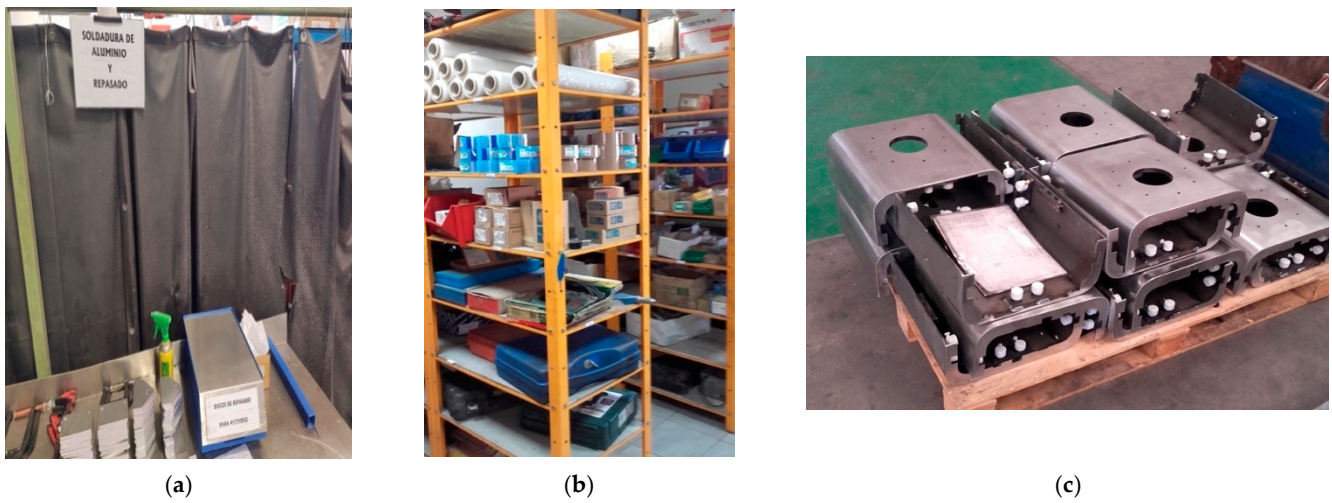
(a) Area for welding aluminium alloy materials, (b) Storage of materials and auxiliary products for manufacturing and packaging, (c) Example of documentation accompanying the product during manufacture.
